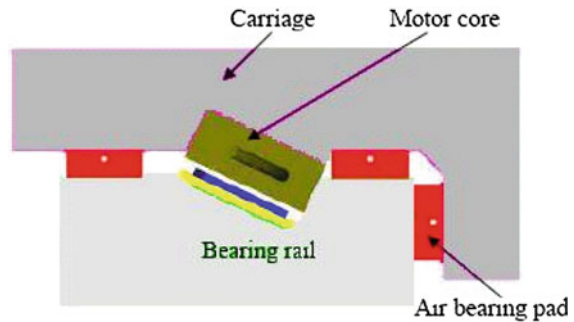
X-Y Feed drives of micro machine tool [7]
